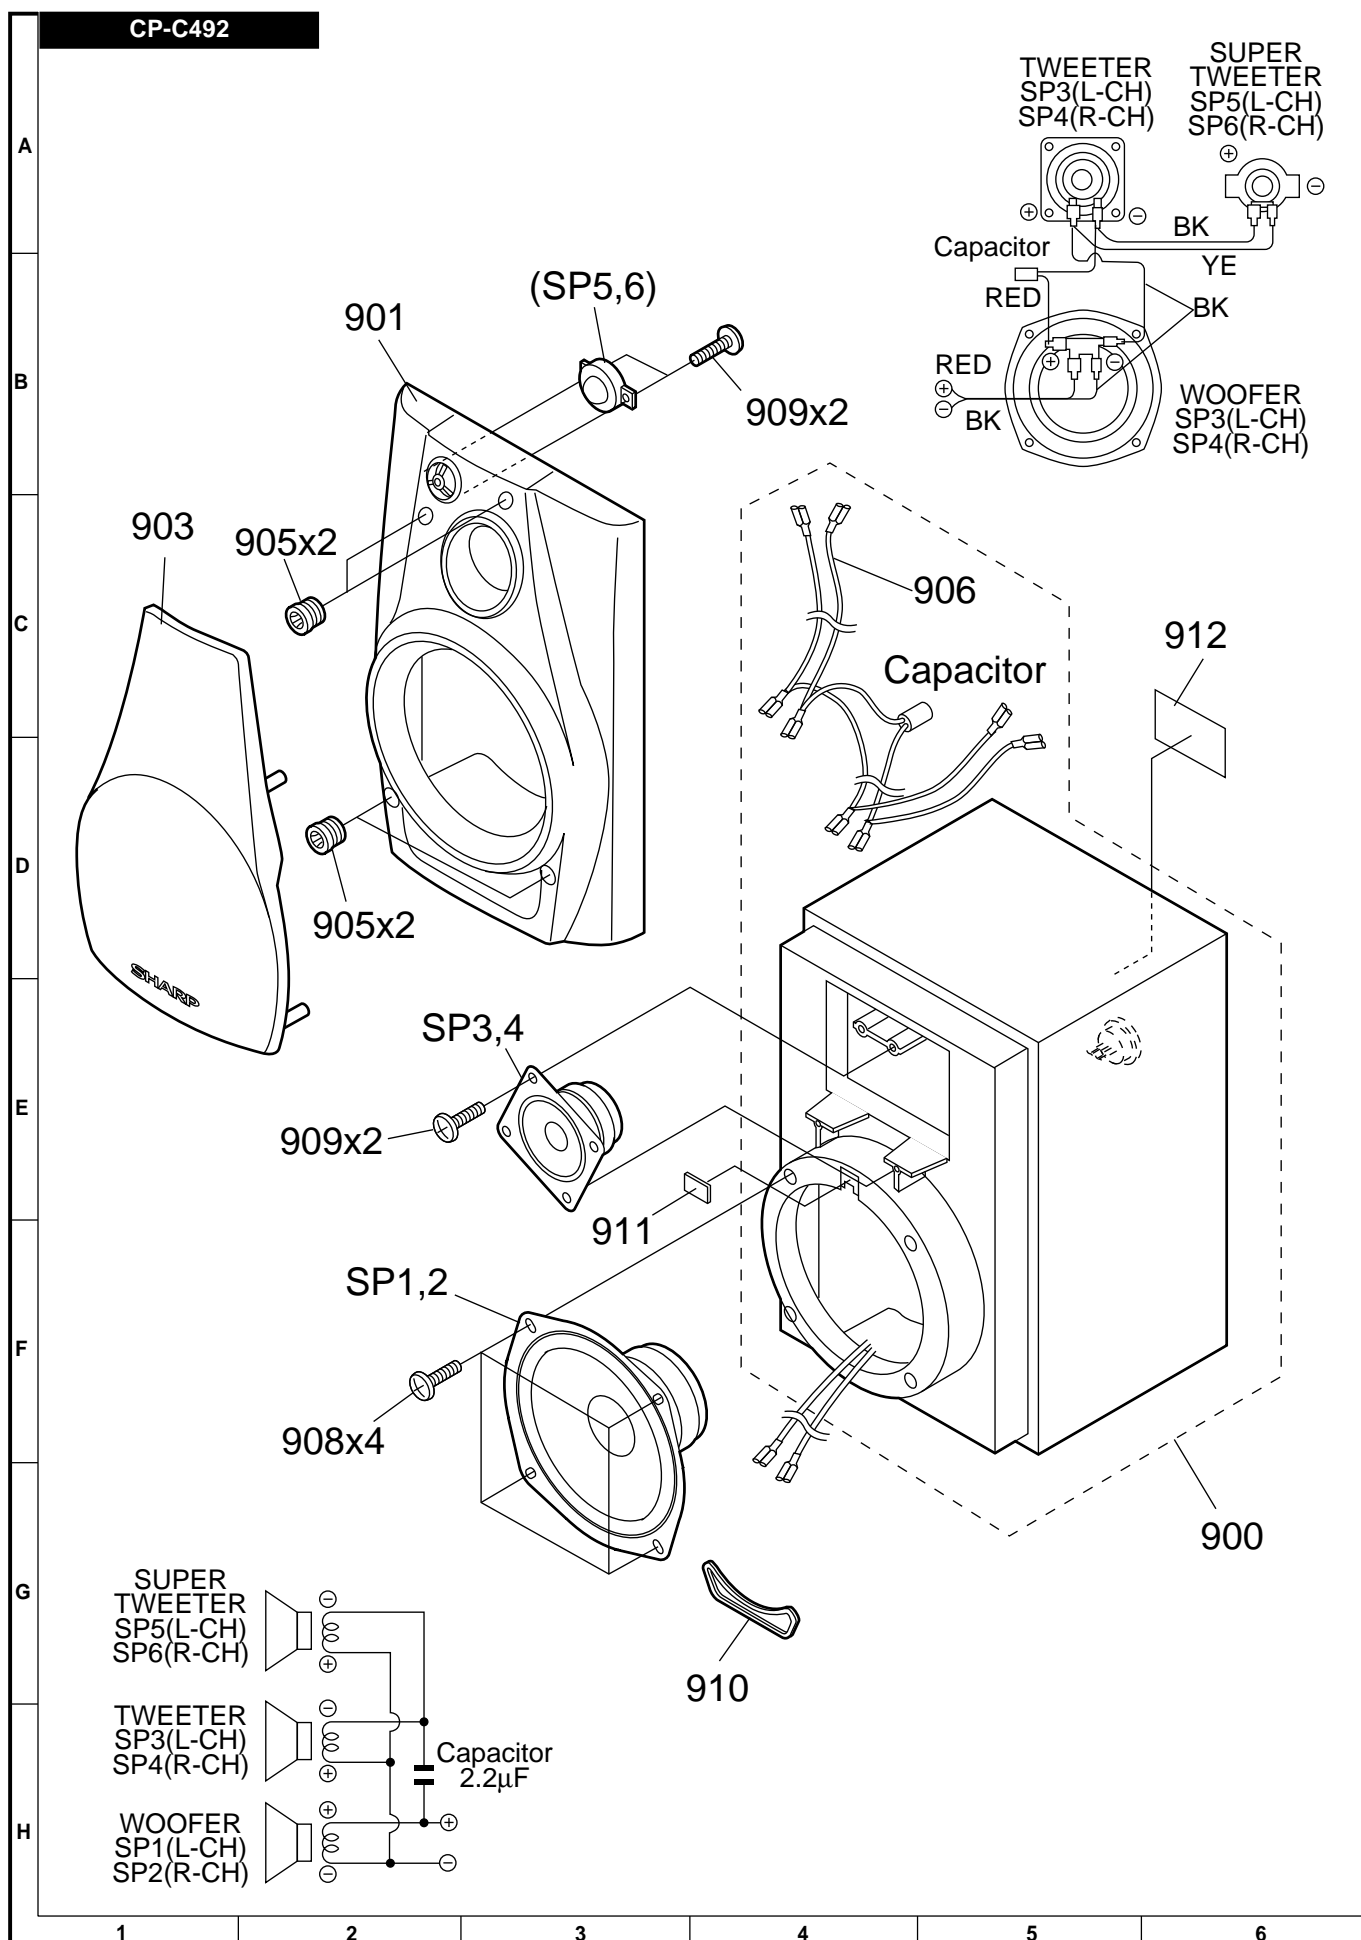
SPEAKER EXPLODED VIEW (1/3)
